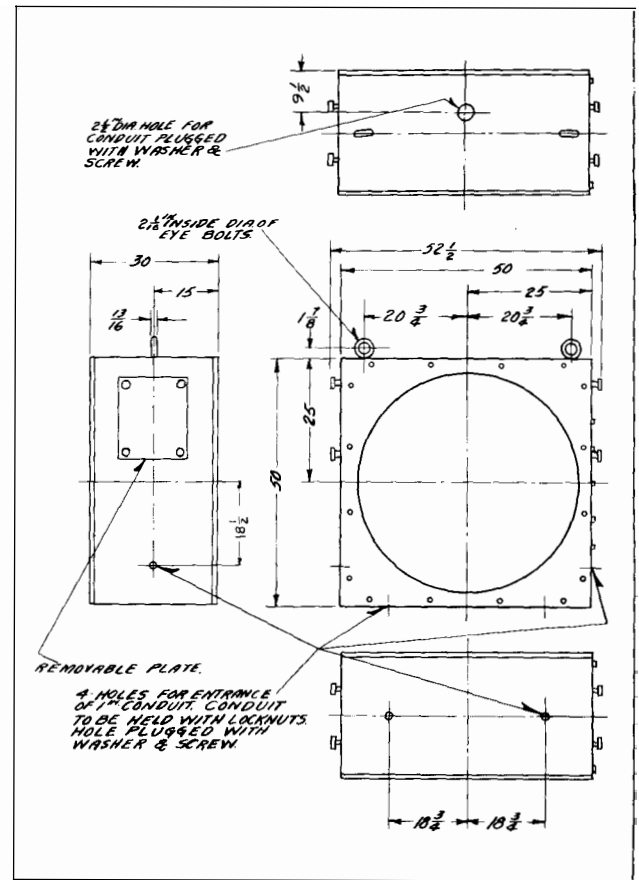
Outline of Type HB Boiler Room Indicator With 40 inch Dial.
